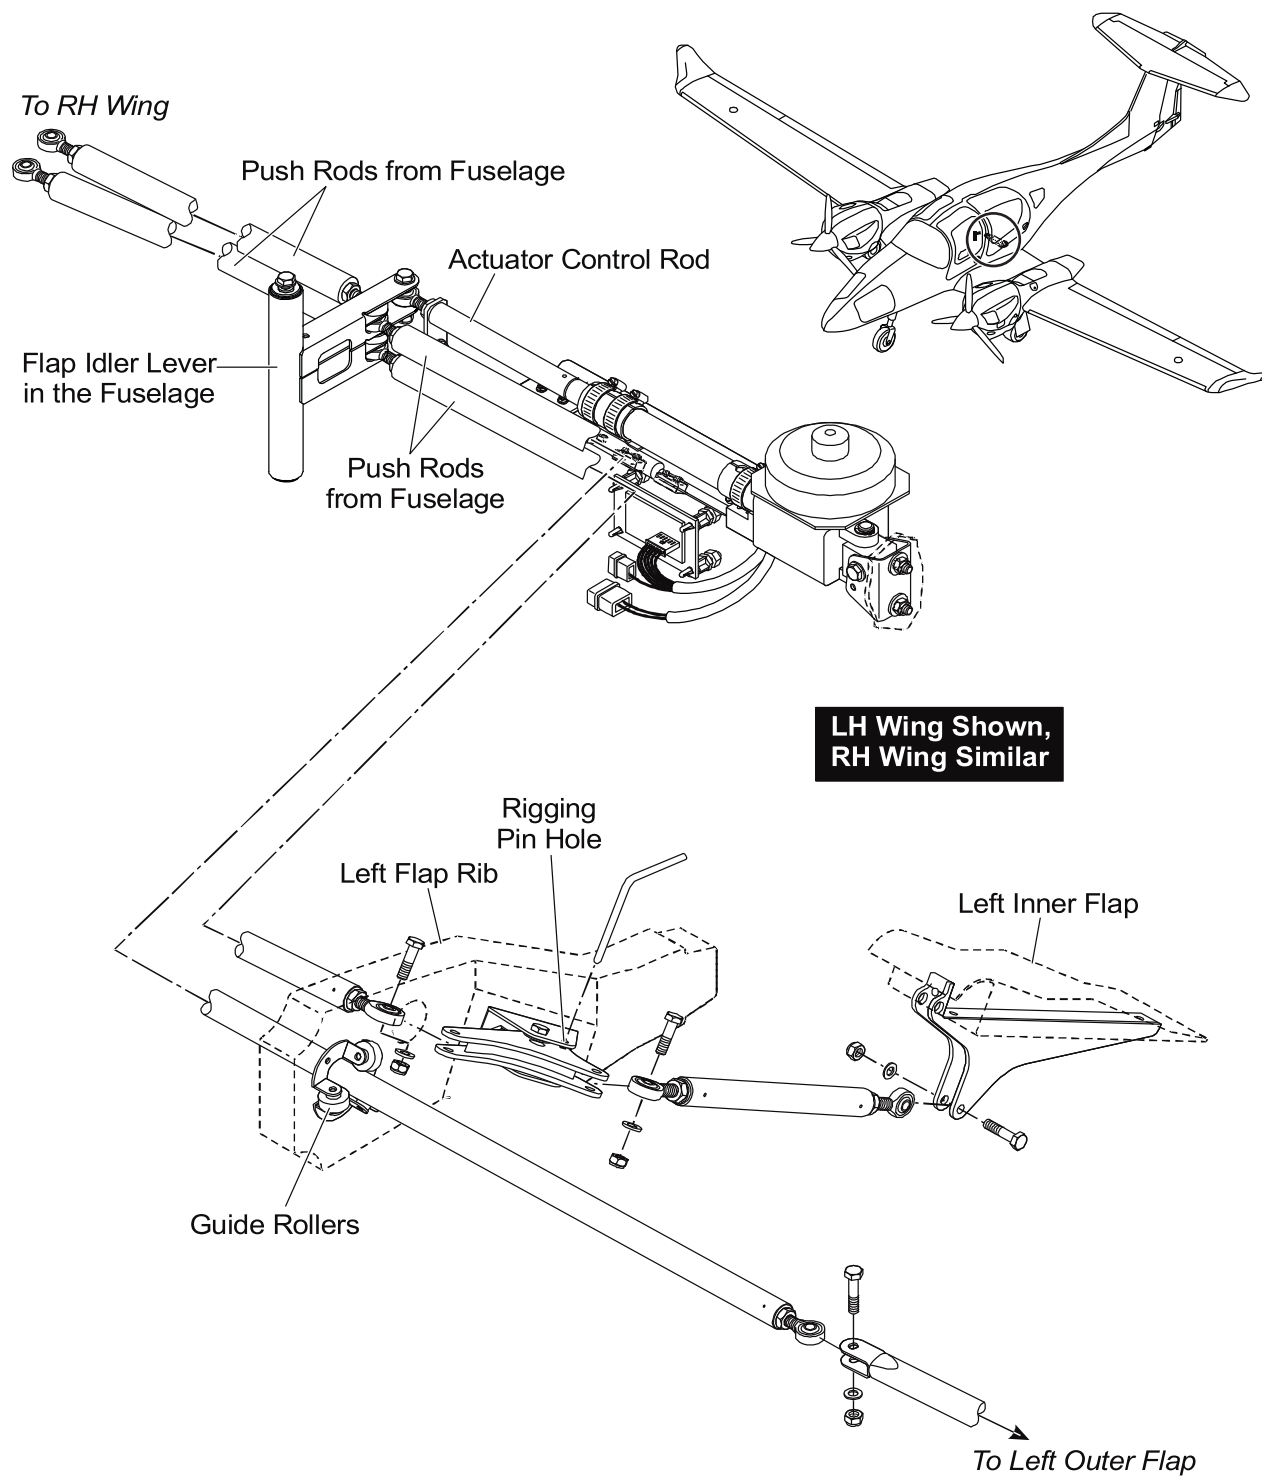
Flap Push-Rods and Bellcranks in the Wings
